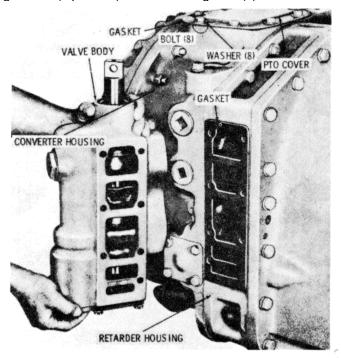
Removing Hydraulic Retarder Control Valve Body Assembly
